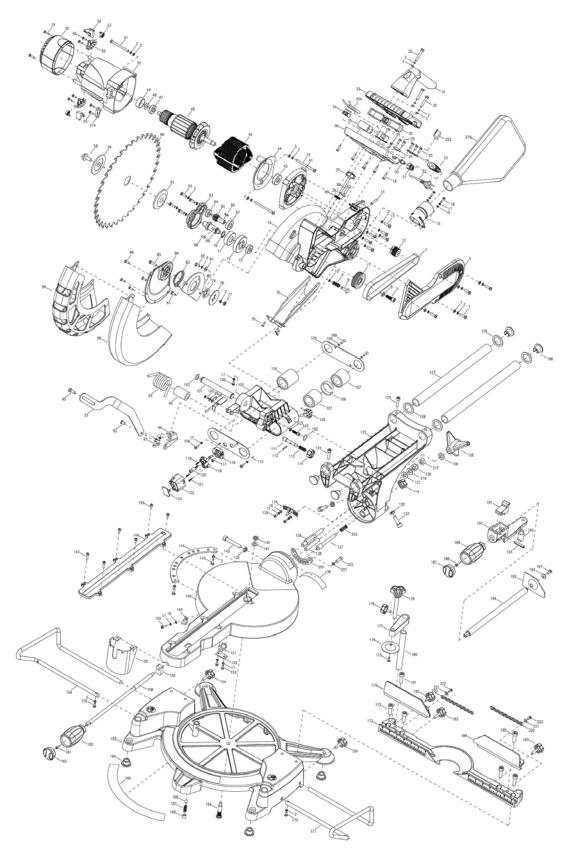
Spare parts drawing KGZ 305  $\rm E$
